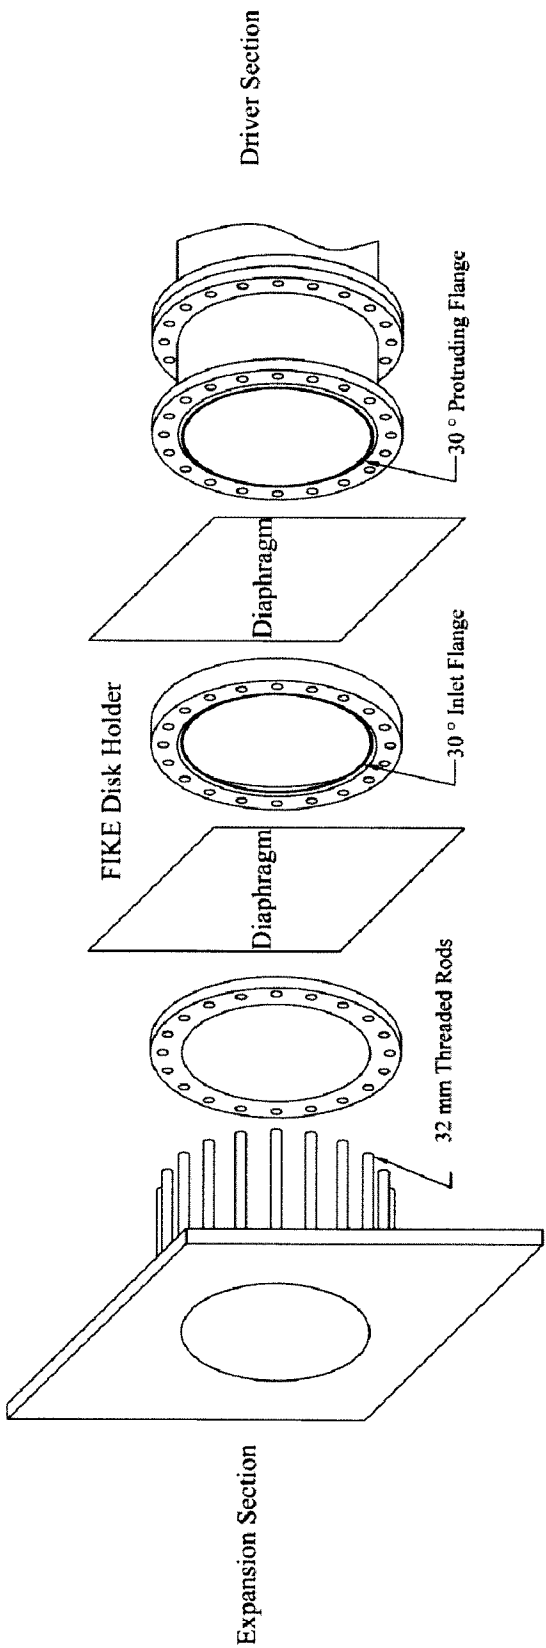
Detailing of Disk Holder (Spool Section) and Diaphragm Sections of Shock Tube
